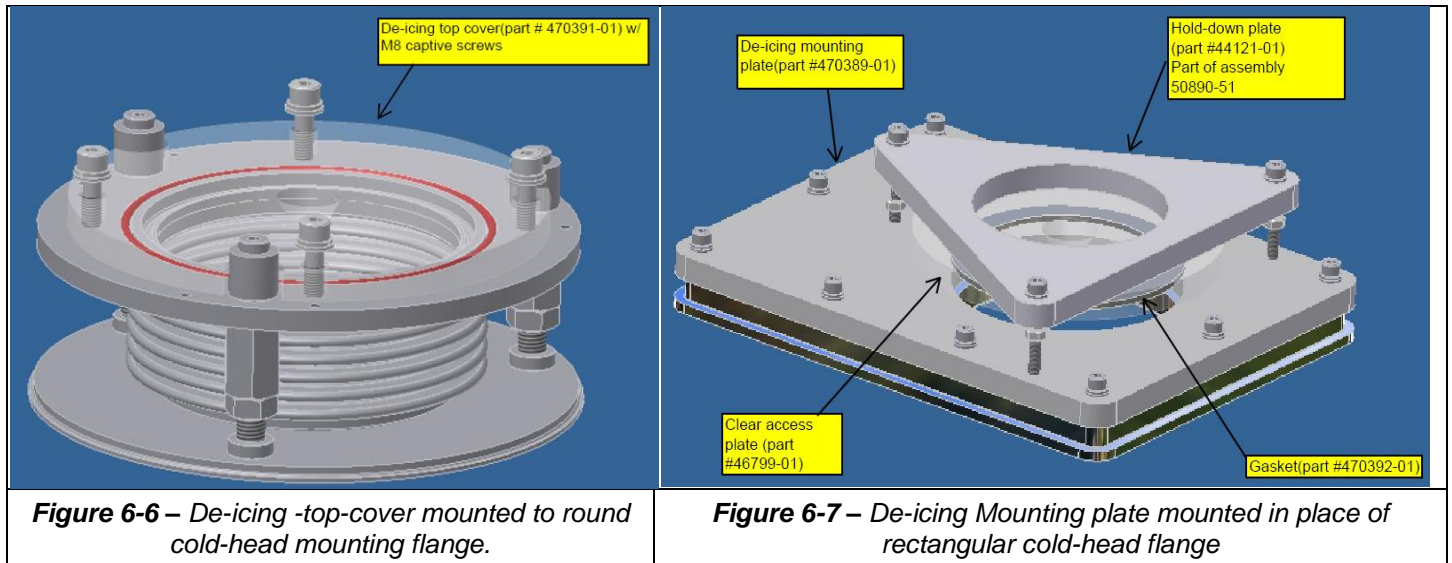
De-icing -top-cover mounted to round cold-head mounting flange.
